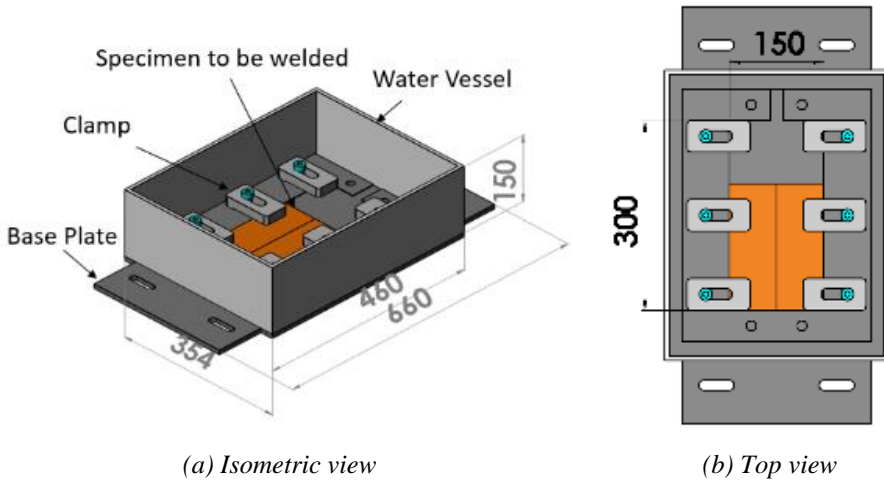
Underwater friction stir welding fixture a) Isometric view b) Top view.
